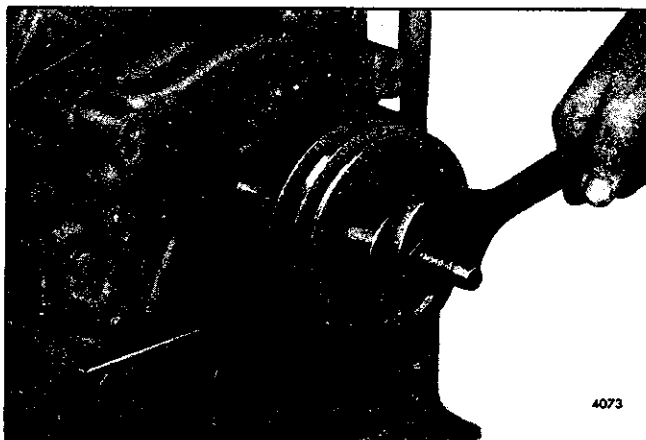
Installing Crankshaft Pulley Using Installer J 7773
